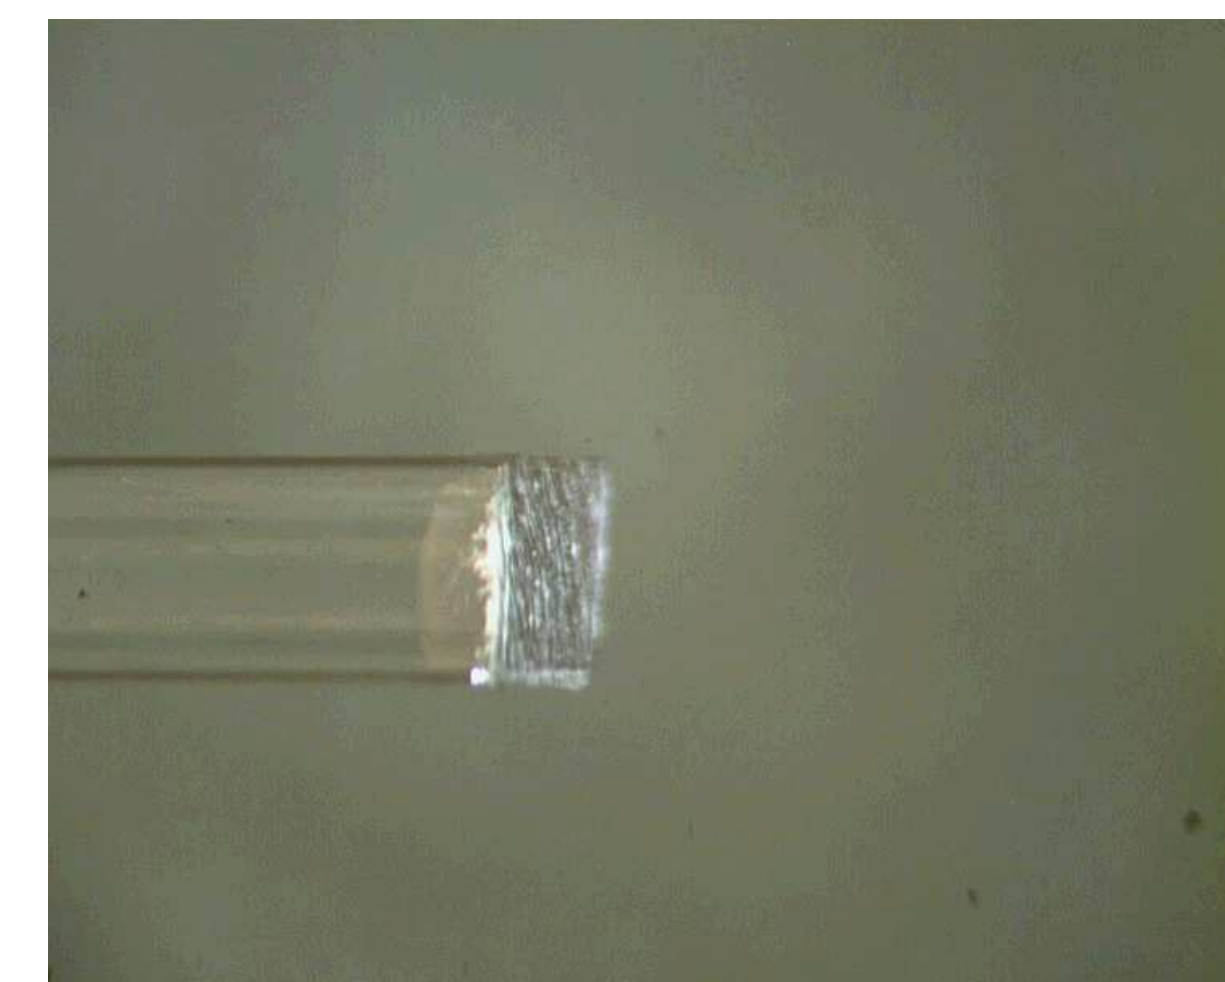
The second step: grinding the exposed core until it is flush with the cladding.
